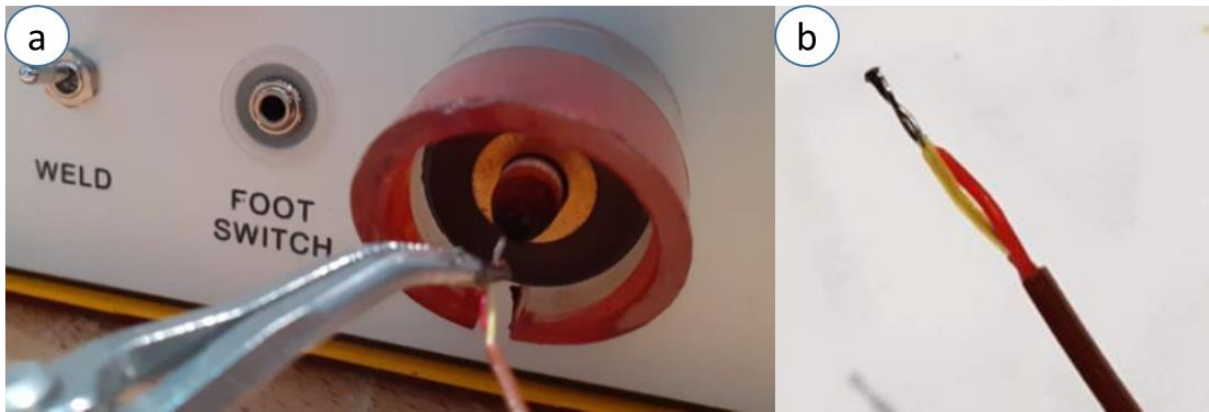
Graphite electrode used for welding the wires (a) - Welded thermocouple extremity (b)
